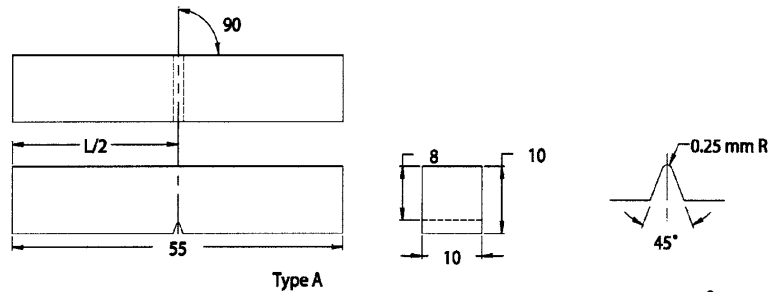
Schematic view of Charpy Impact Test specimen.
